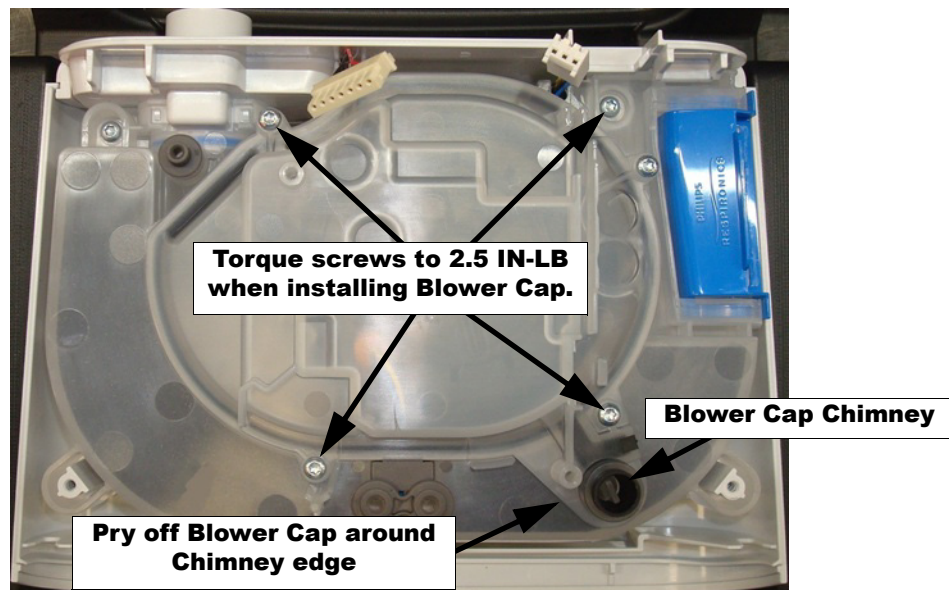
BLOWER UPPER CAP REMOVAL
